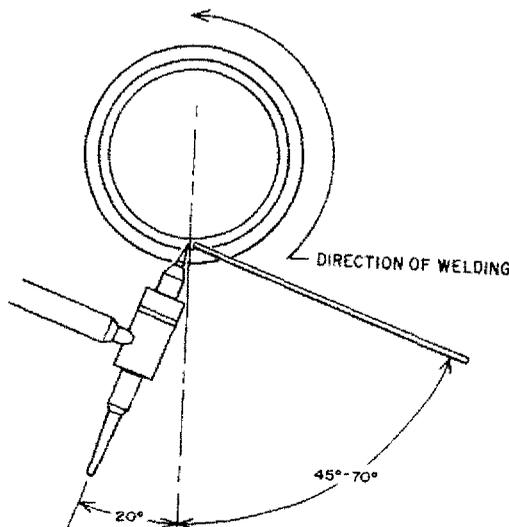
Correct angles of the tungsten electrode and the electrode when welding.
